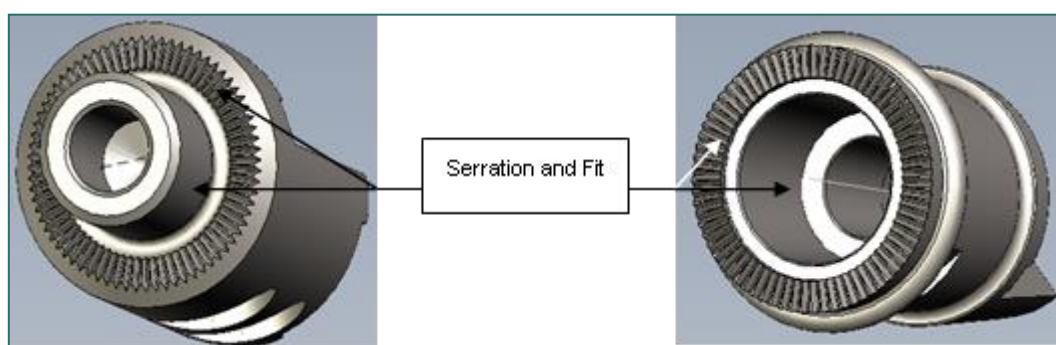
MUTARS® CYLINDRICAL FIT AND SERRATION CONNECTION
